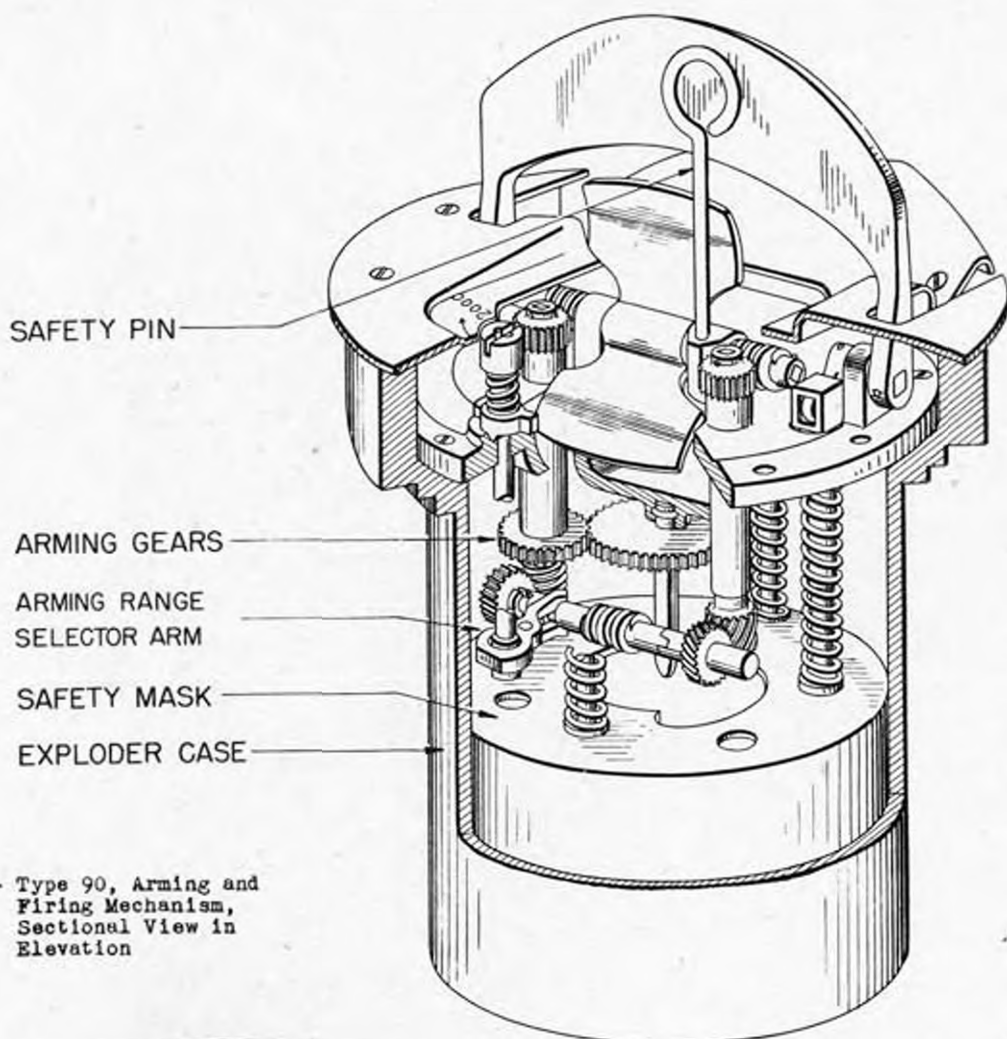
Type 90, Arming and Firing Mechanism, Sectional View in Elevation
